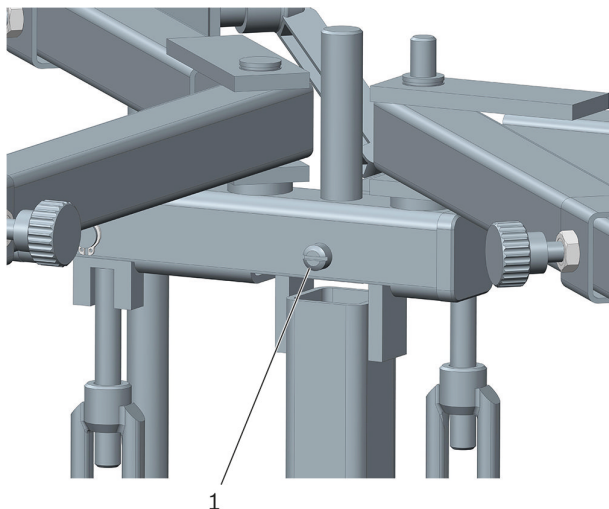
Position of shaft screw 1; shaft screw 2 is on opposite side (not visible)
